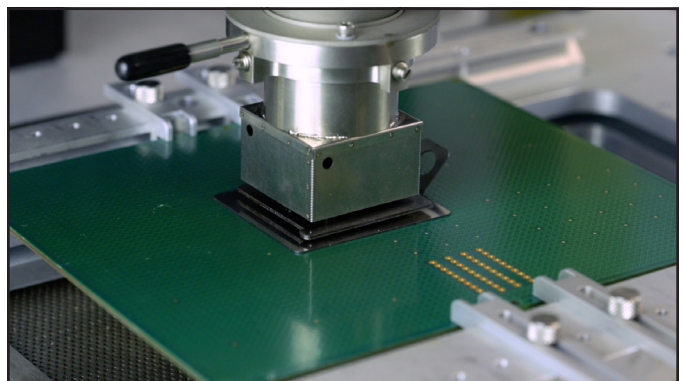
Placing the component on a flat surface and using convection air to reflow the solder balls onto the component
